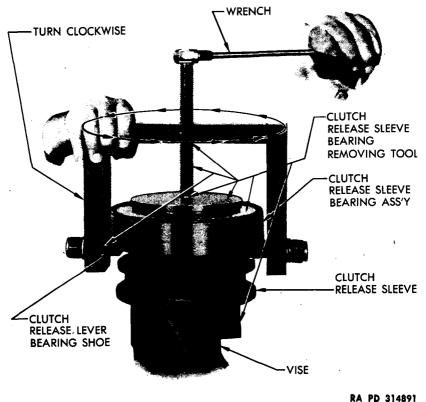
Removing Clutch Release Sleeve Bearing, Using Puller (41-P-2906-75)
